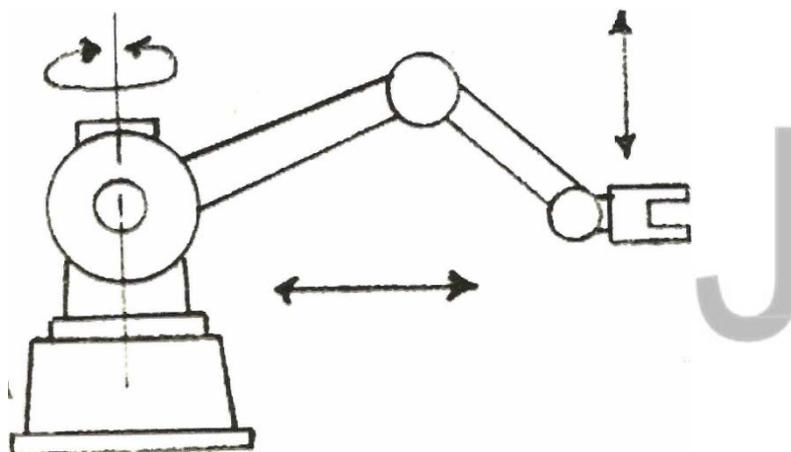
Jointed Arm/Revolute Robot: used in castings, die-burring and spray painting.
